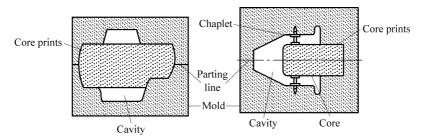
Examples of sand cores showing core prints and chaplets to support cores
